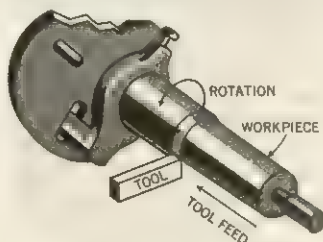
BASIC MACHINE-TOOL OPERATIONS: TURNING
